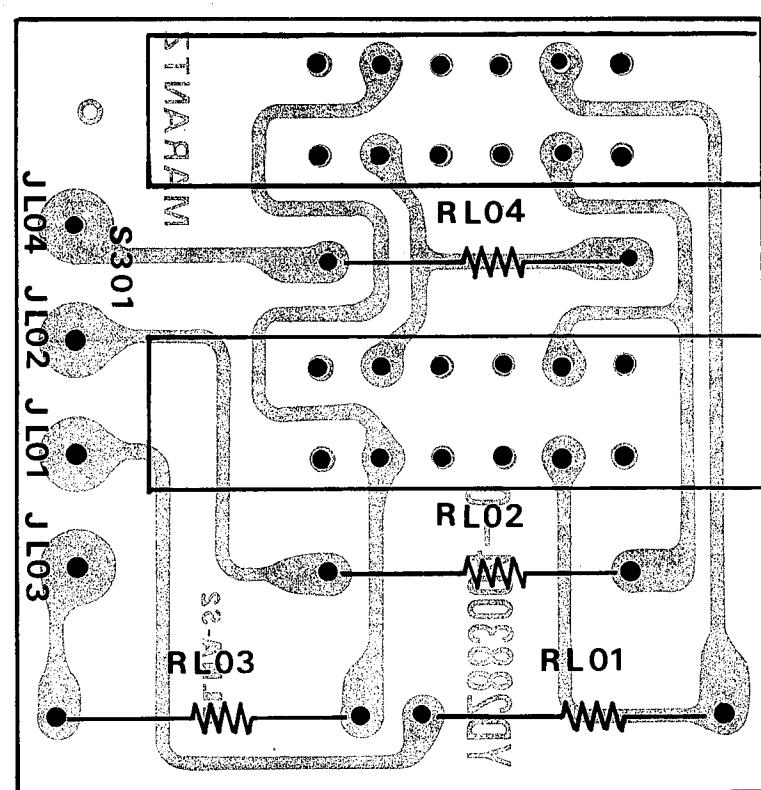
Main-Remote Speaker Switch Unit Assembly
